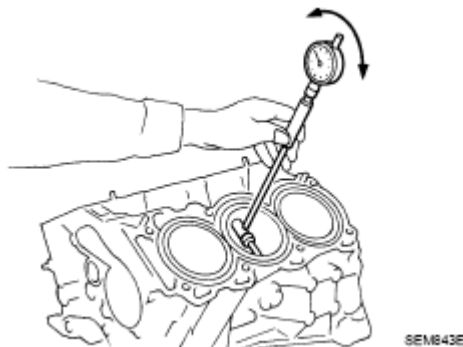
Checking Clearance Of Piston-To-Cylinder Bore
